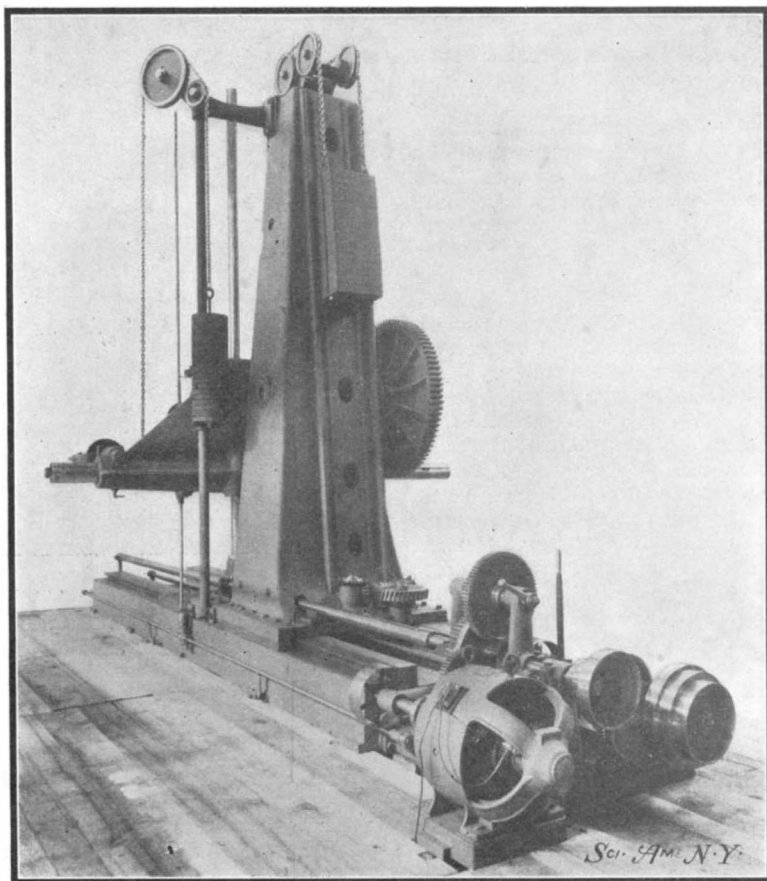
AMERICAN HORIZONTAL BORING, MILLING, AND DRILLING MACHINE.
